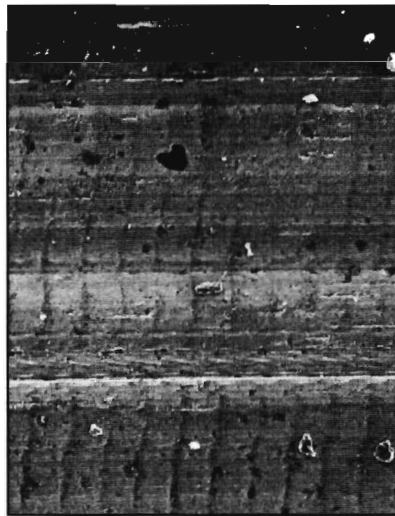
Surface profile of machined 95%Pt-5%Ru.
